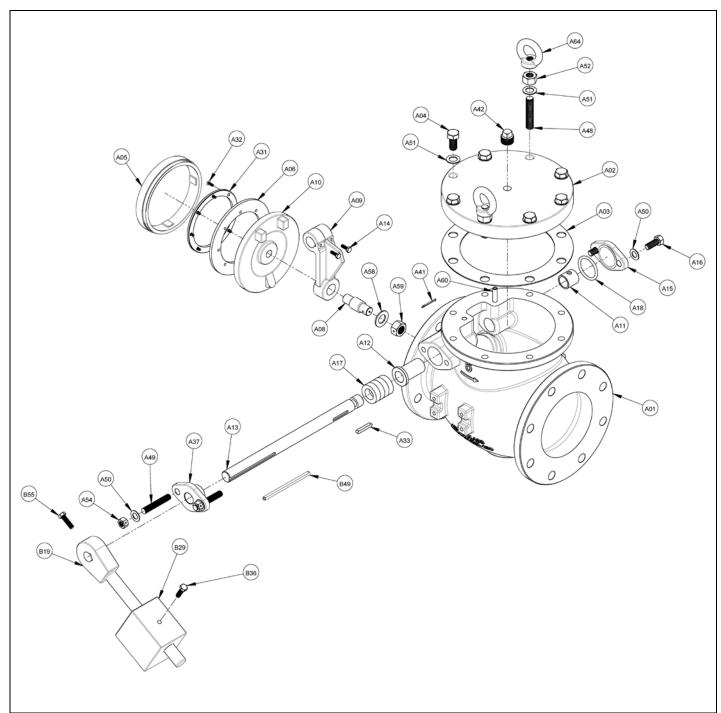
CVS-250/250A Swing Check Valve (Lever & Weight)
